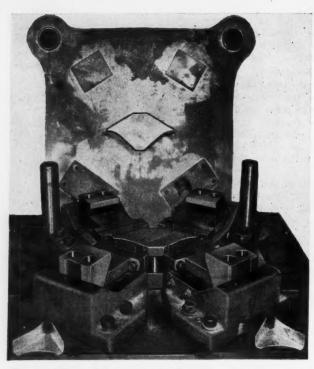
Typical Dieset Mounted with Four Cam-Action Die Units. This Die Produces Two Parts with Contoured Flanges at Each Stroke of the Press
